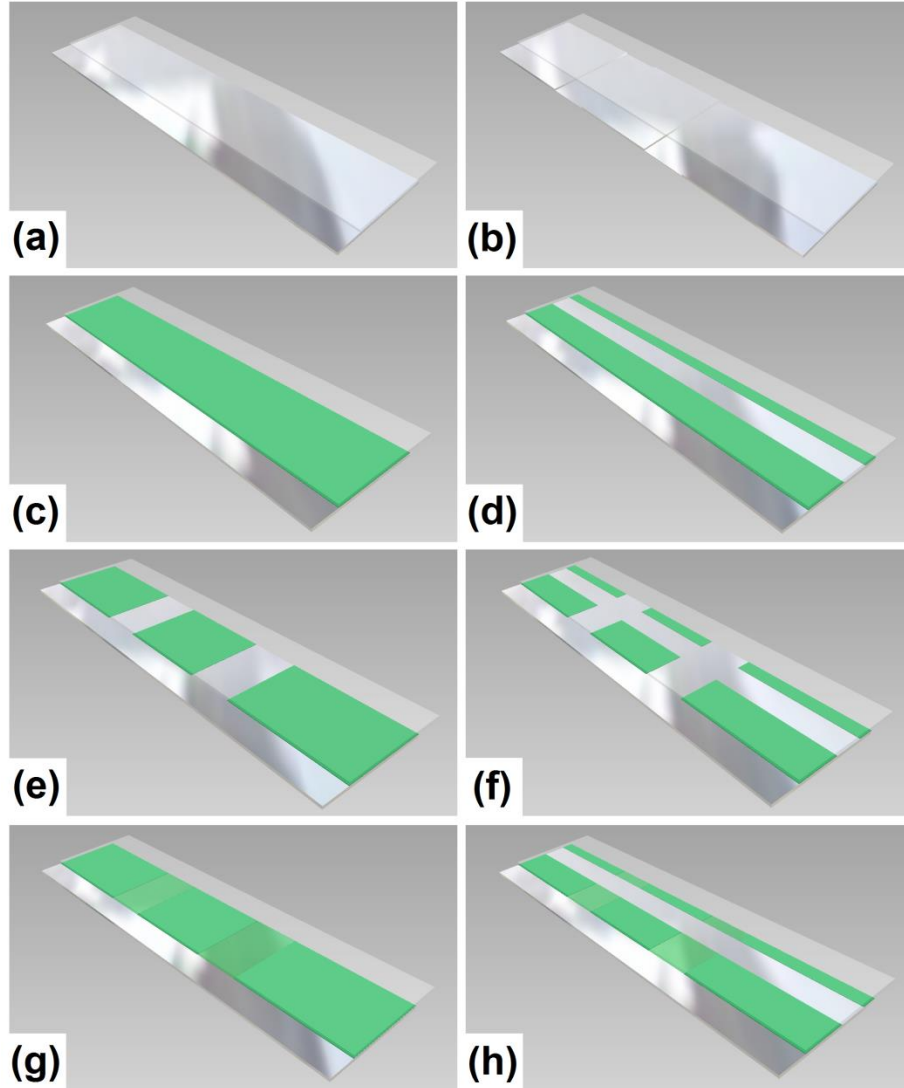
Sealant Configurations: (a) No Sealant; (b) Machined Gaps; (c) Full Sealant; (d) Edge Sealant; (e) Full Gap; (f) Edge Gap; (g) Full Thin Sealant; (h) Edge Thin Sealant
